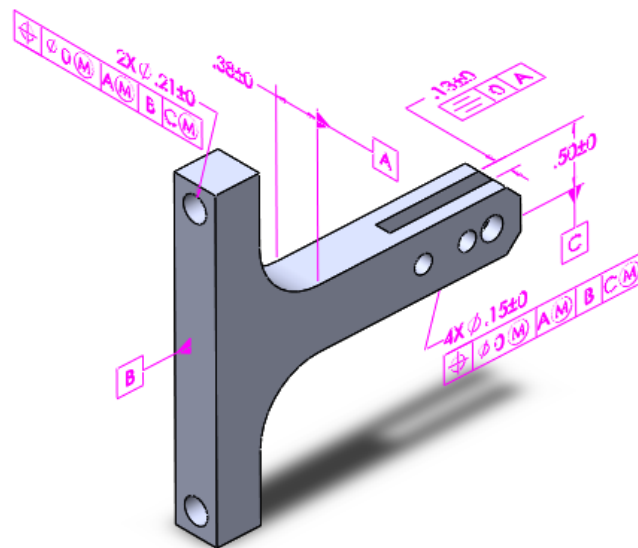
9: Right Support with Size Tolerance Frames Added
